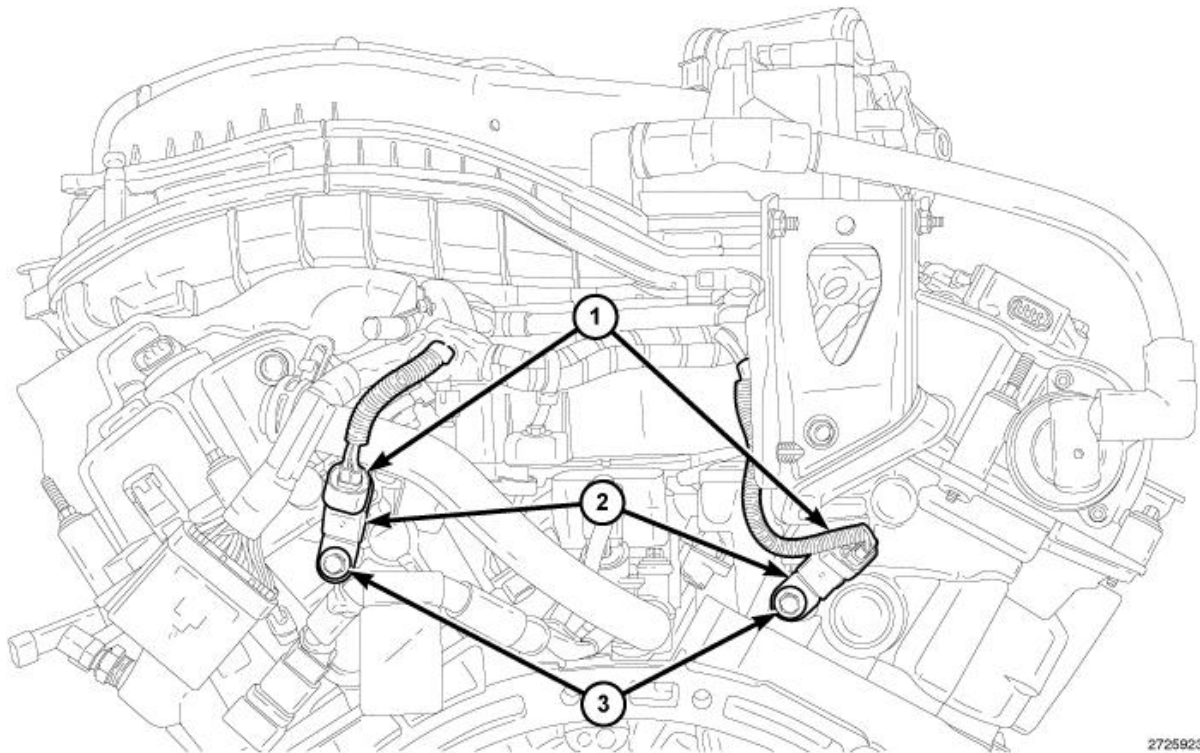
Electrical Connector, Mounting Bolt & Ignition Coil Capacitor
